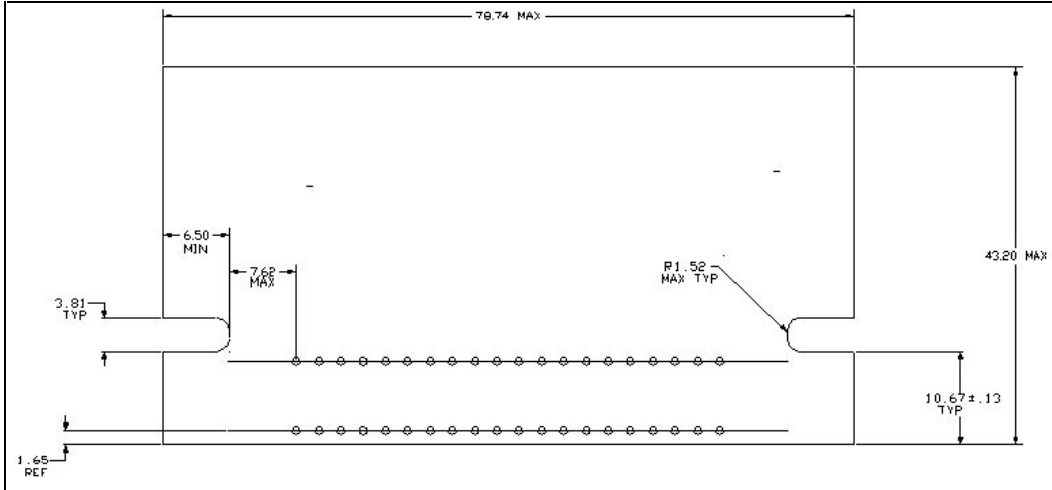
Module Printed Wiring Board (Dimensions in mm)
